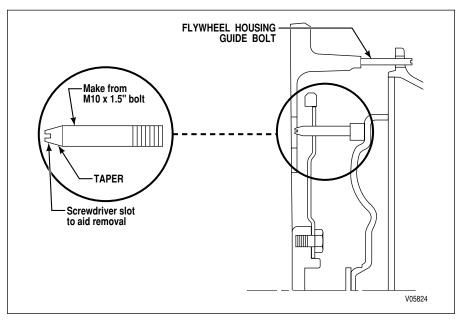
Pilot Tool For Transmission-To-Engine Alignment
